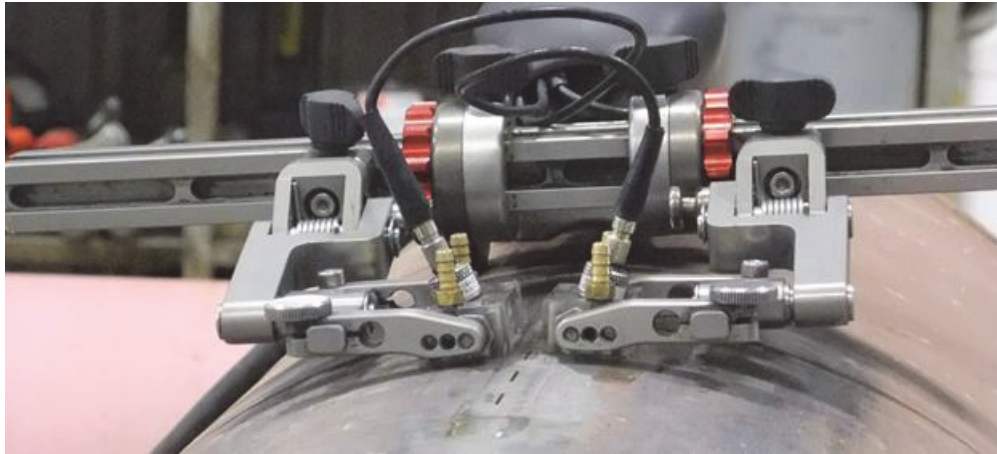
Time-of-Flight Diffraction Head for Seam Weld Inspection
